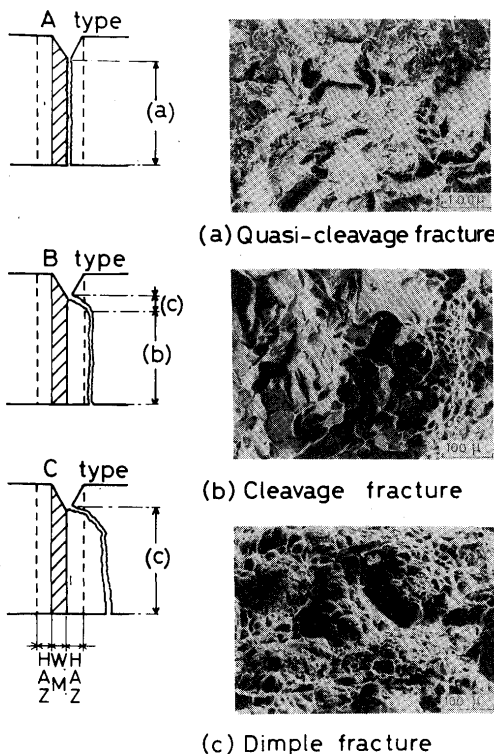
Schematic diagram of various fracture paths and fracture surfaces.
